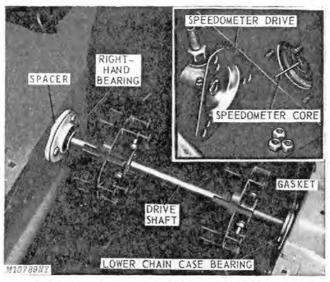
Removing Drive Shaft Bearing Flangette Bolts
